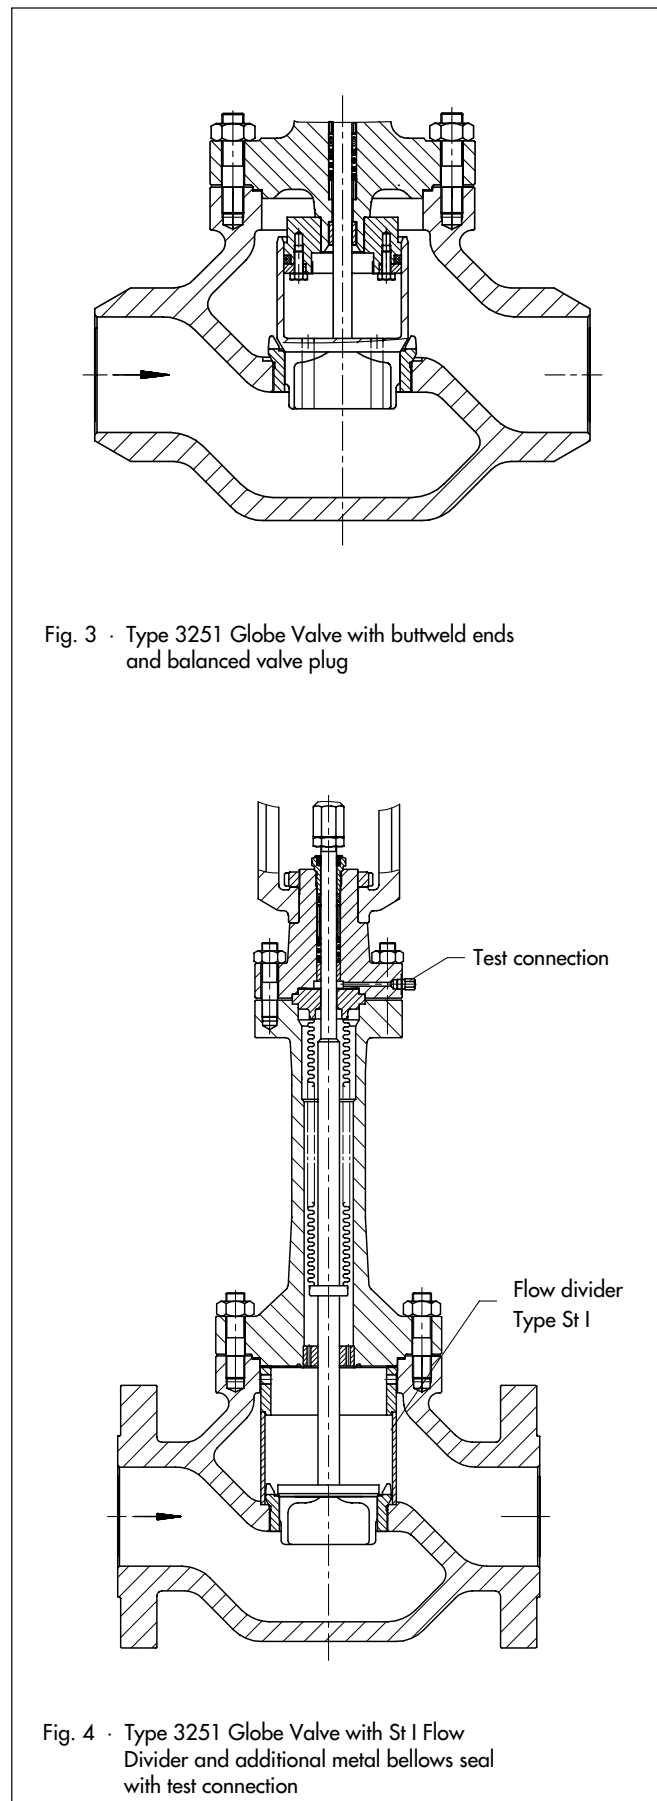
· Type 3251 Globe Valve with butt-welded ends
